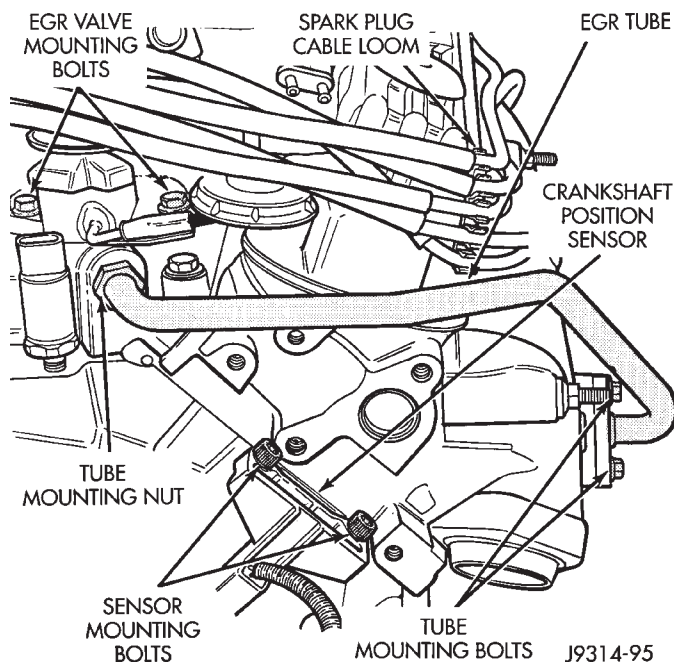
EGR Valve Mounting Bolts—5.2L Engines
